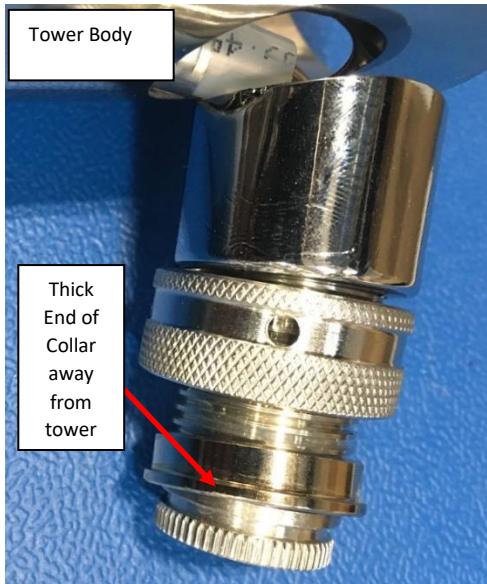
Elbow Shank Collar inserted over Elbow Shank.
